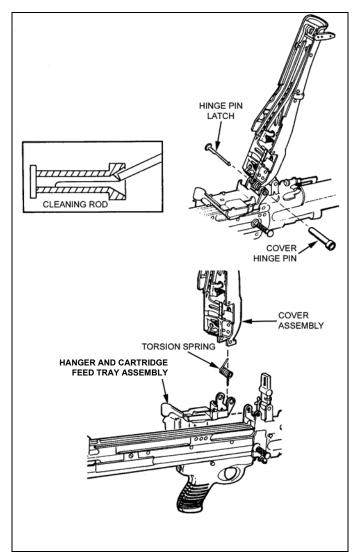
Removal of the cover, hanger, and cartridge feed tray assemblies.
